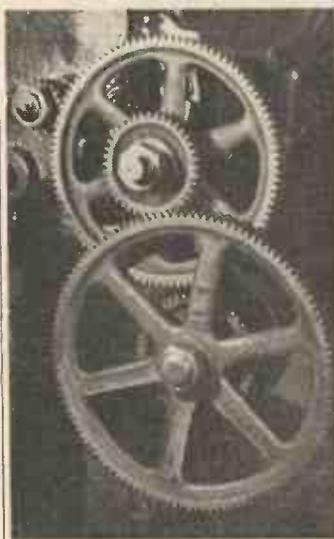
A compound train. The gear behind the lead-screw wheel is used as packing.
